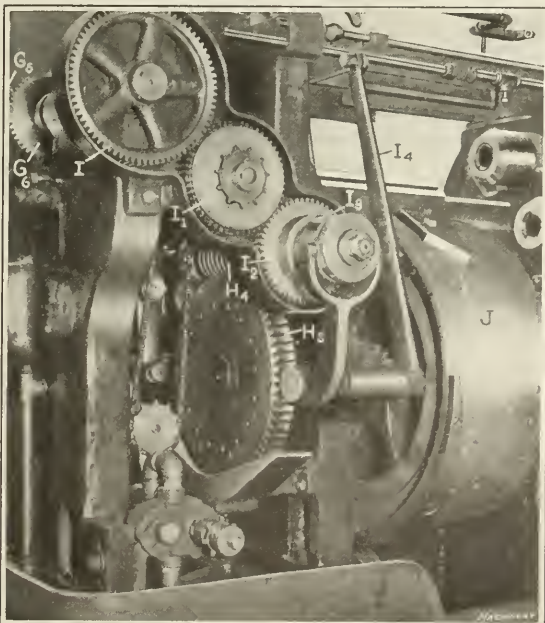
Partially Dismantled View, showing Gears and Clutch for operating Main Cam-shaft at Fast Speed for accomplishing Idle Movements
